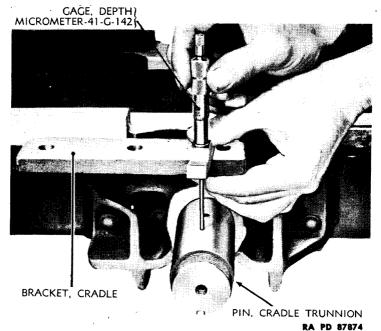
Checking Distance From Cradle Bracket to Cradle Trunnion Pin
